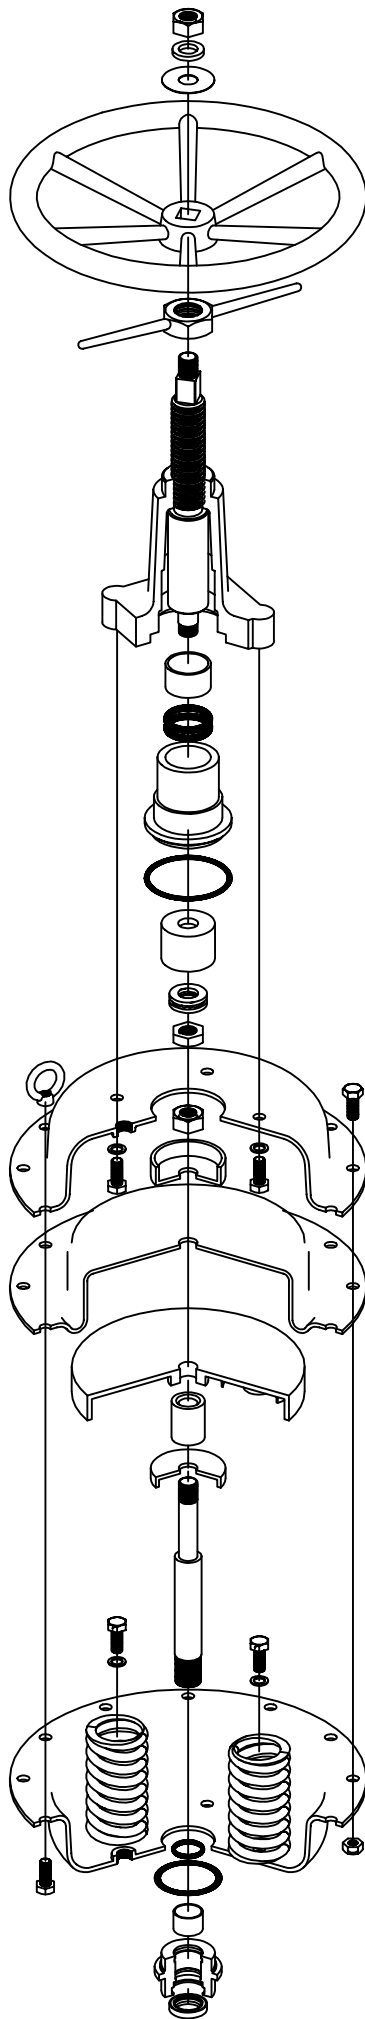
Series 500 Actuator with Top Handwheel
